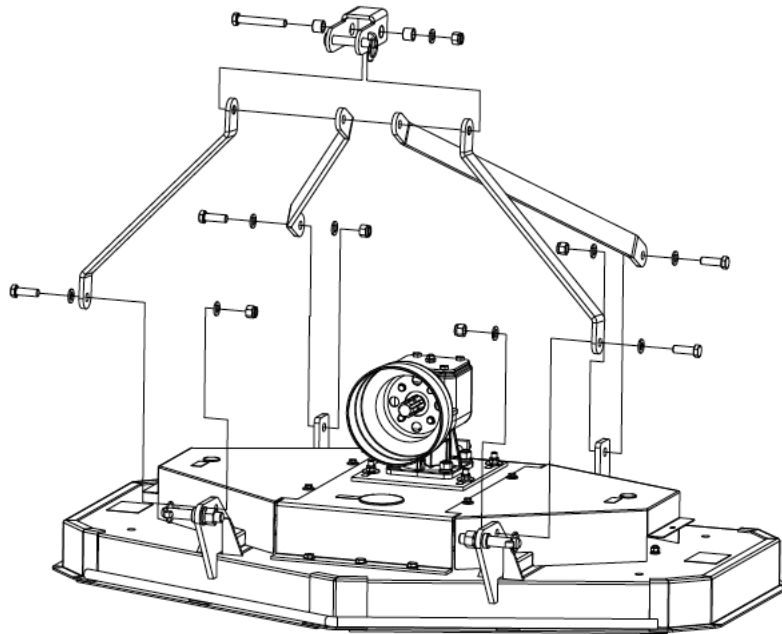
Installing Long, Short Pivot Bar, Upper Lift Bracket and Fittings
